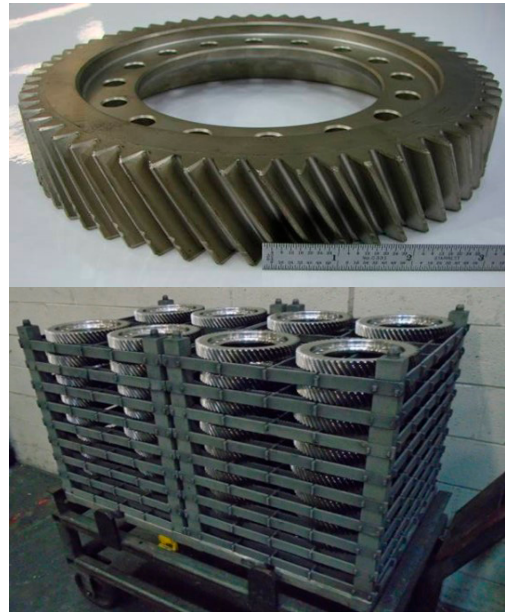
Final drive ring gear and production load consisting of 9 layers.
